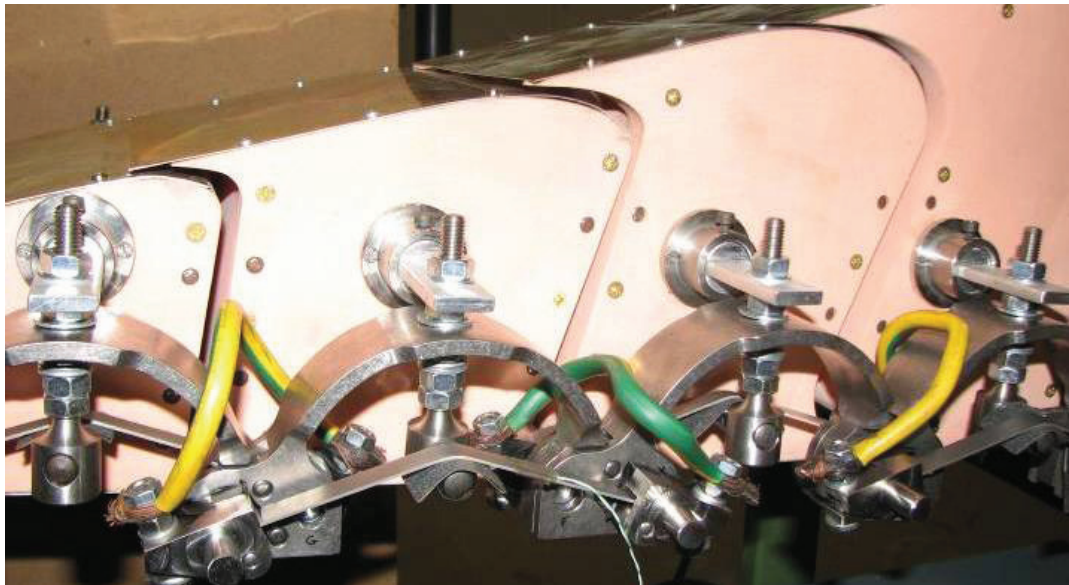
Fully assembled prototype: details of the rib-rigid boxes connections.
